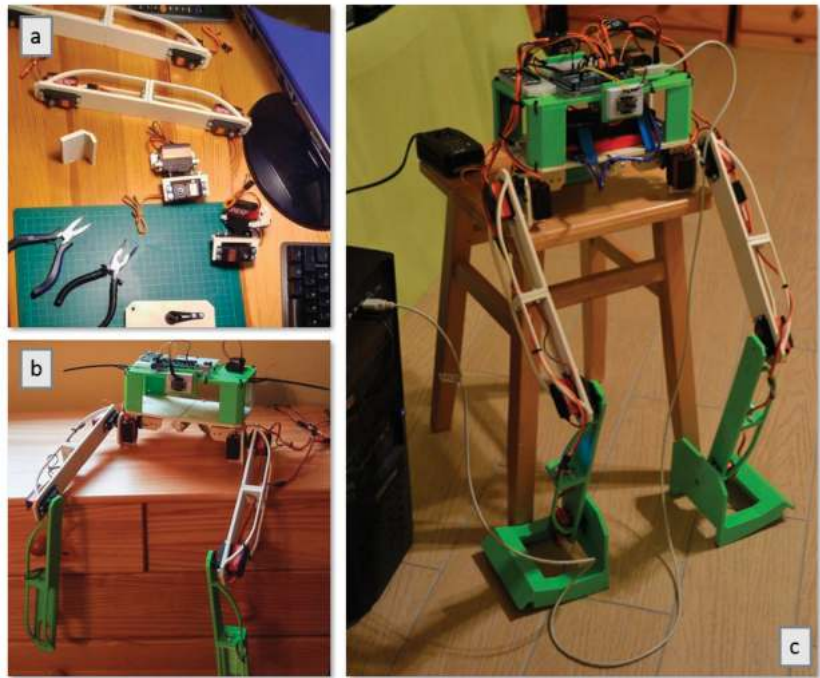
A tested prototype of bipedal robot MaRoš (a) construction parts; (b) partial construction; (c) final version.
